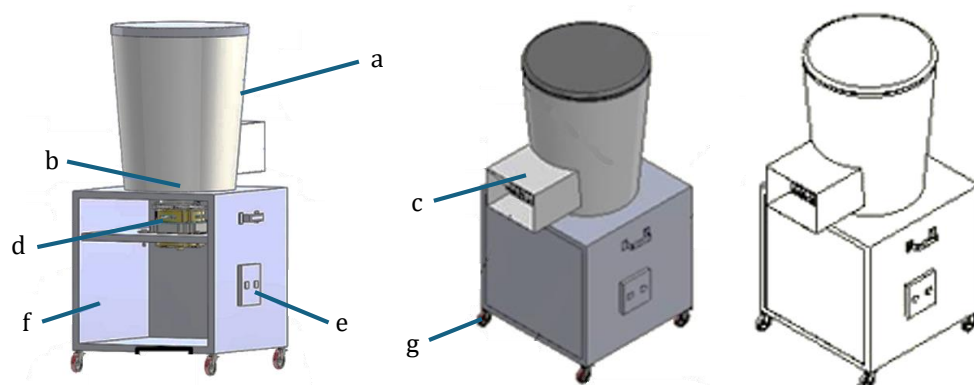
Technical drawing of Grass Ninja 220 Chopper Machine
